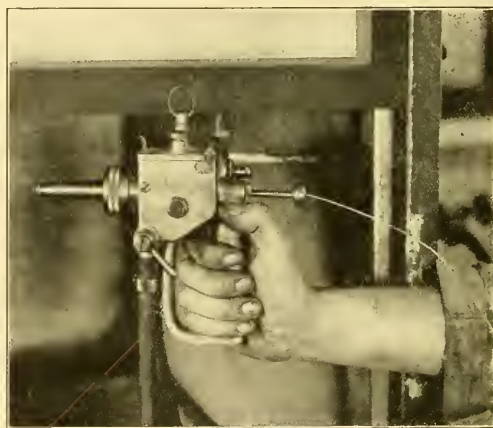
VIEW OF A COMMERCIAL SPRAYING PISTOL IN HAND READY FOR USE
